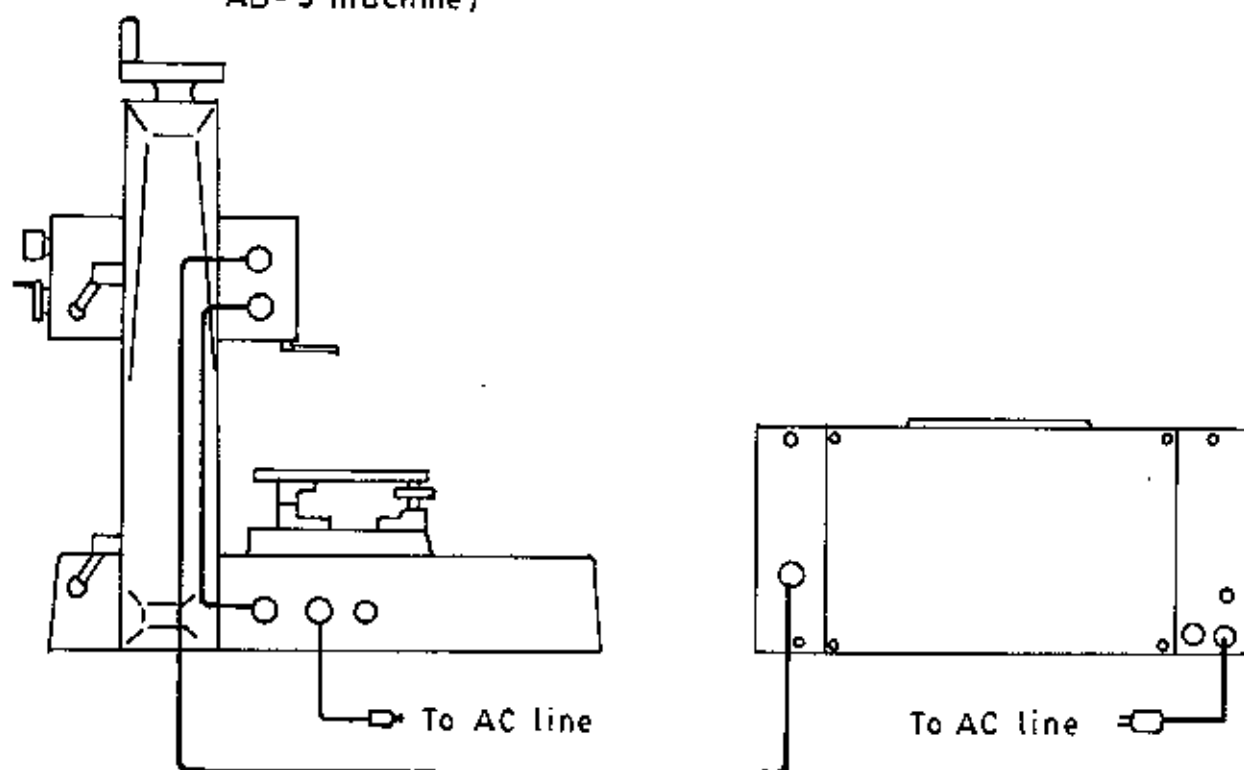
Surface roughness measuring equipment (surf. test AB-5 machine)
